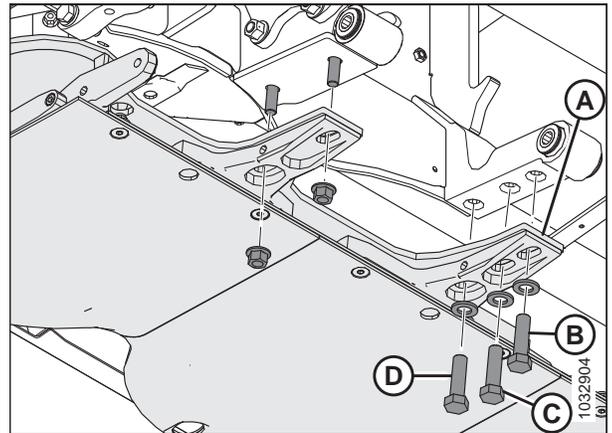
Cutterbar – Bottom View, Left End Shown, Inboard Support
